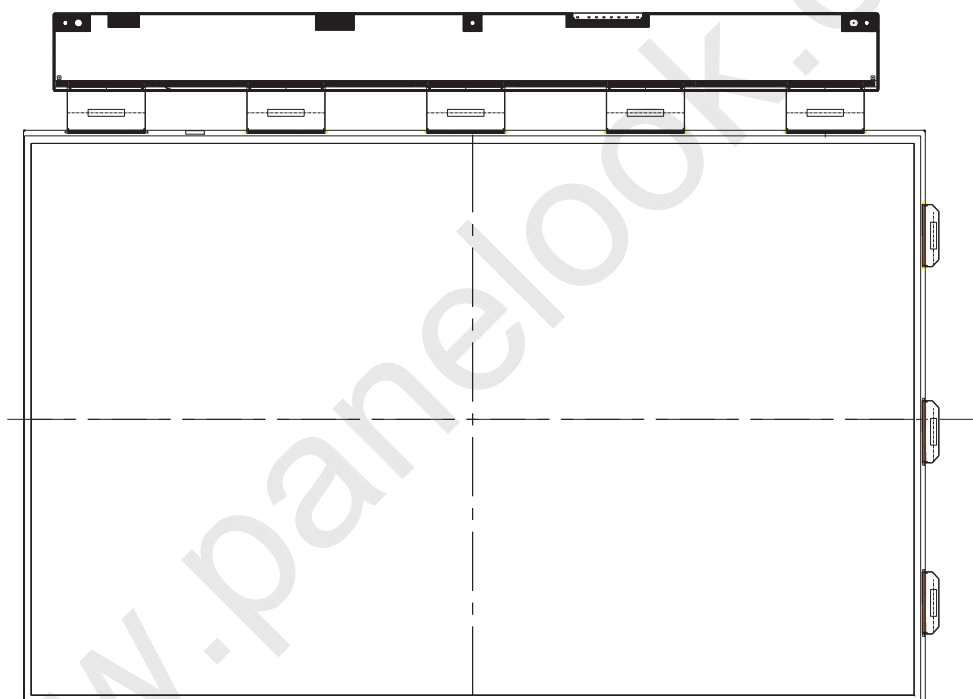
TFT-LCD FOB Outline Dimension (Front View)
